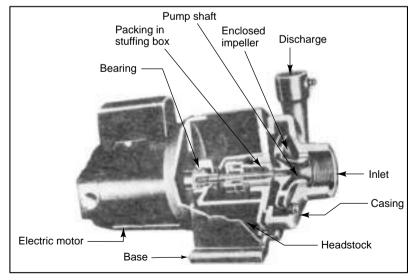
Cut-away section of a horizontal centrifugal pump coupled to electric motor as a single unit
